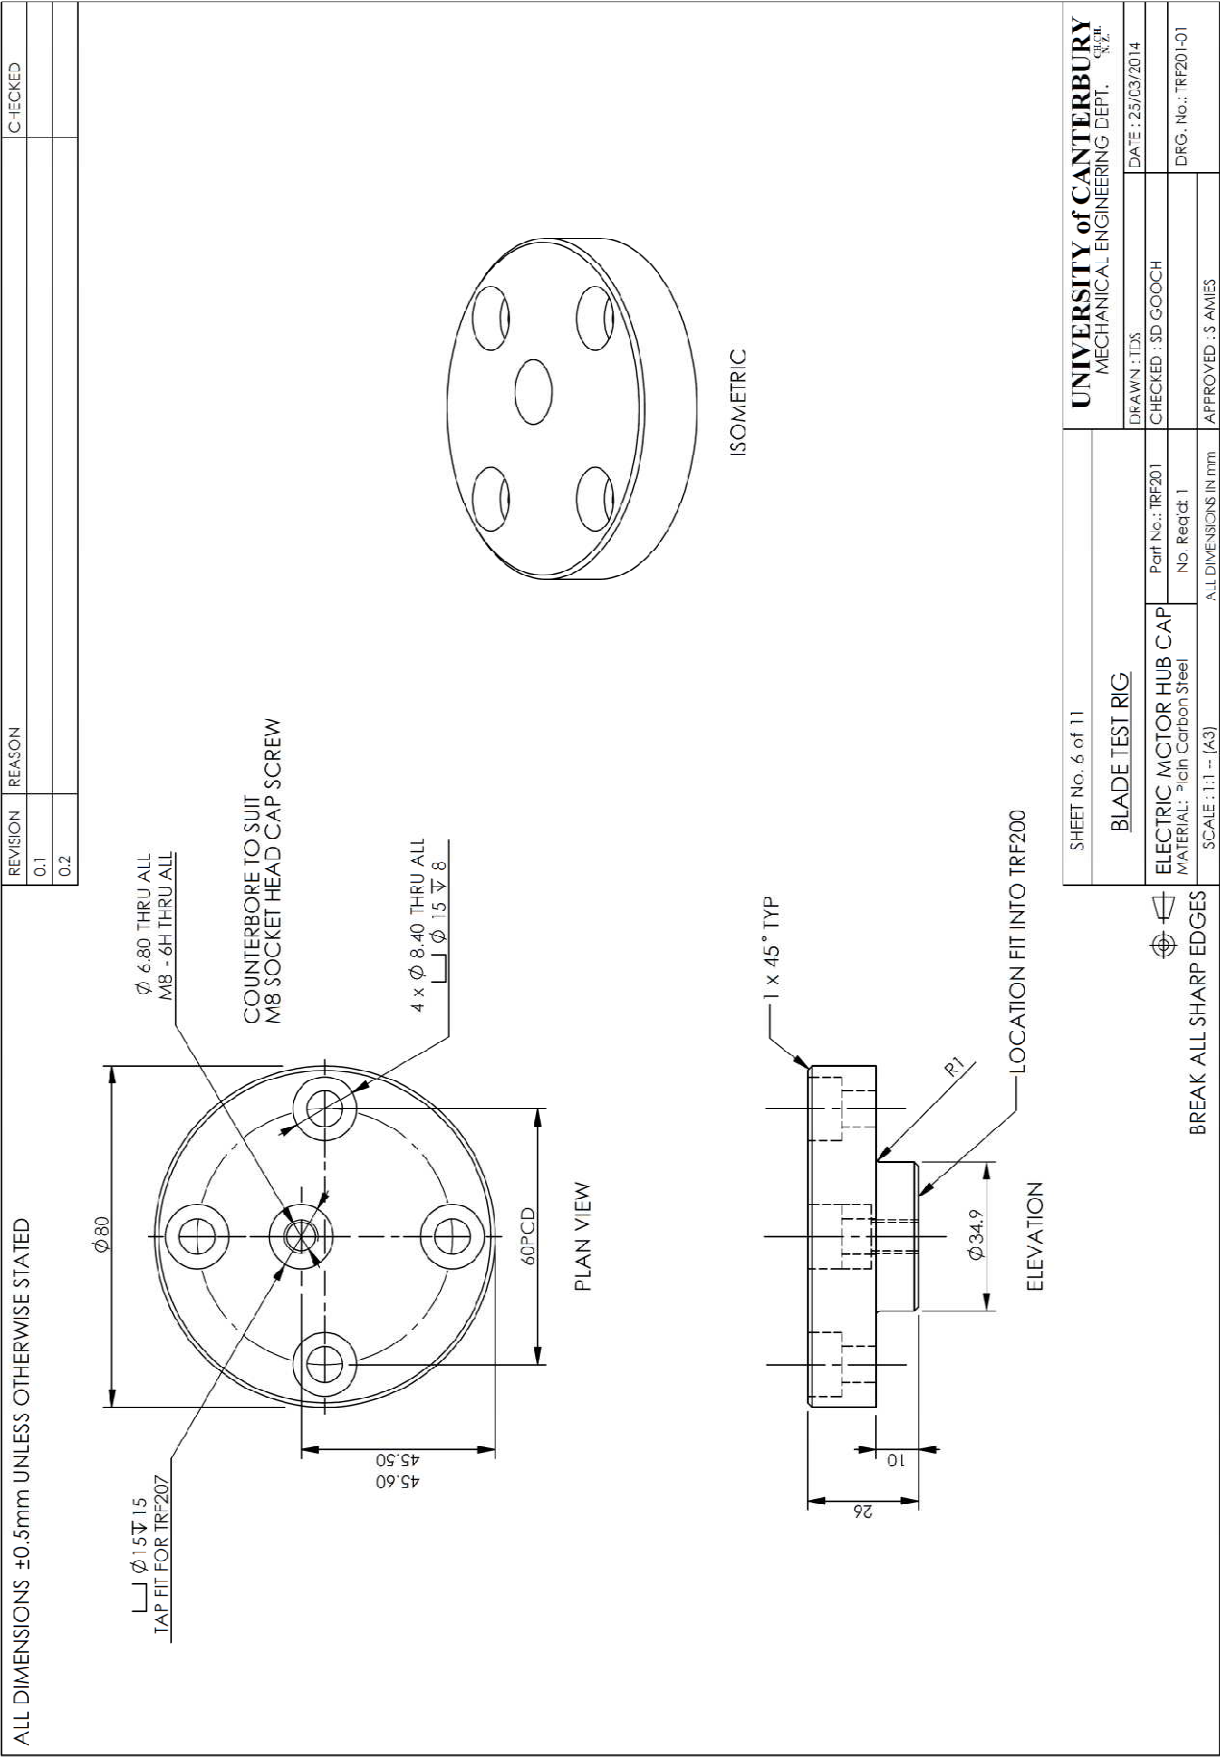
Manufacturing drawing of electric motor drive hub cap in fatigue test rig.
